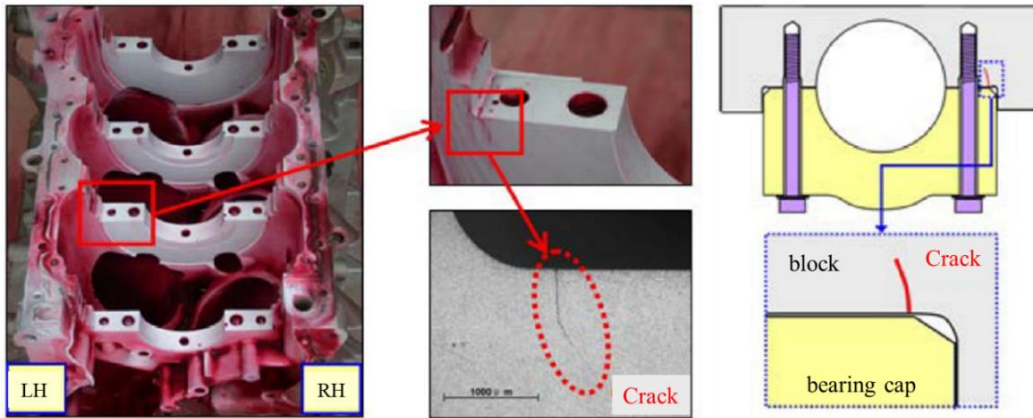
Fretting fatigue failures of the gasoline engine block (Reprinted with permission from [21])
